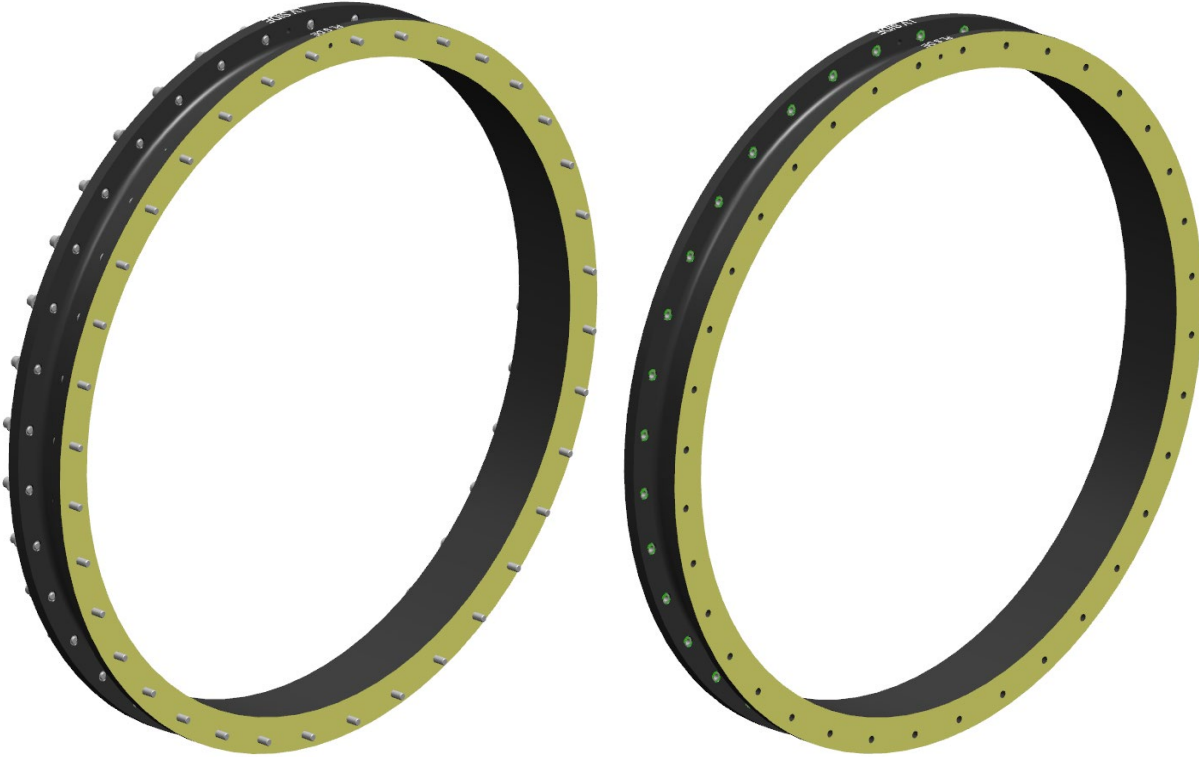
24" Diameter Mechanical Interface Ring (Inserts)
